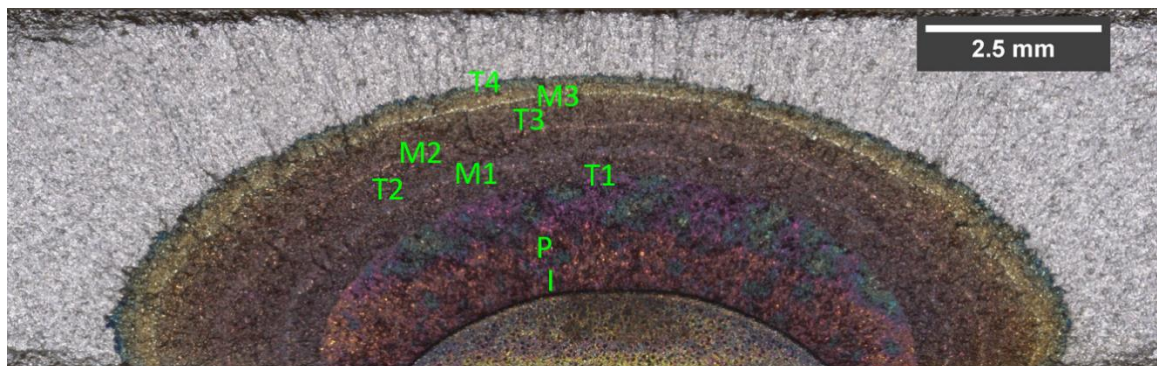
Optical fractograph of the TMF test's fracture surface showing TMF bands separated by thin marker bands
